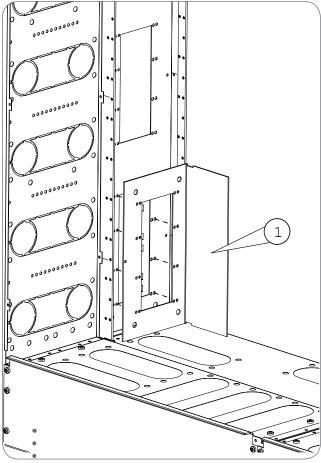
Installing flash barrier in E-serie light cell centre.
